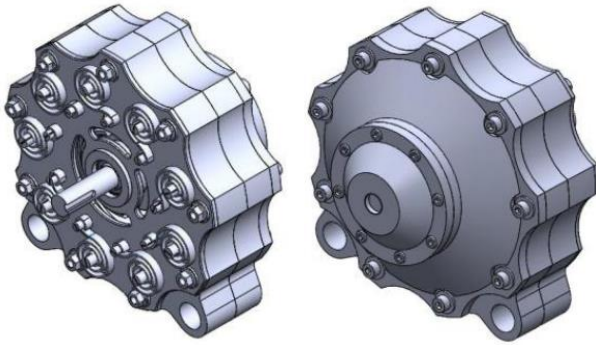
Left: front view of the engine. Right: rear view of the engine.
